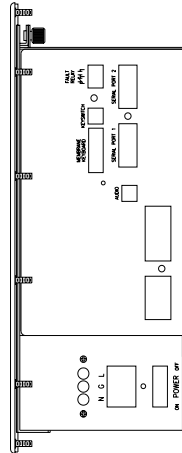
PanelMate 3000 Keypad Unit Side View
